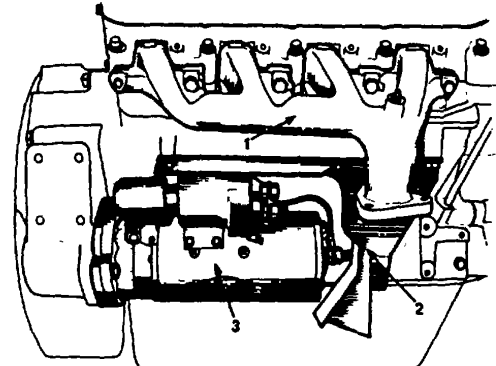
Remove Exhaust Manifold, Heat Shield and Starting Motor
